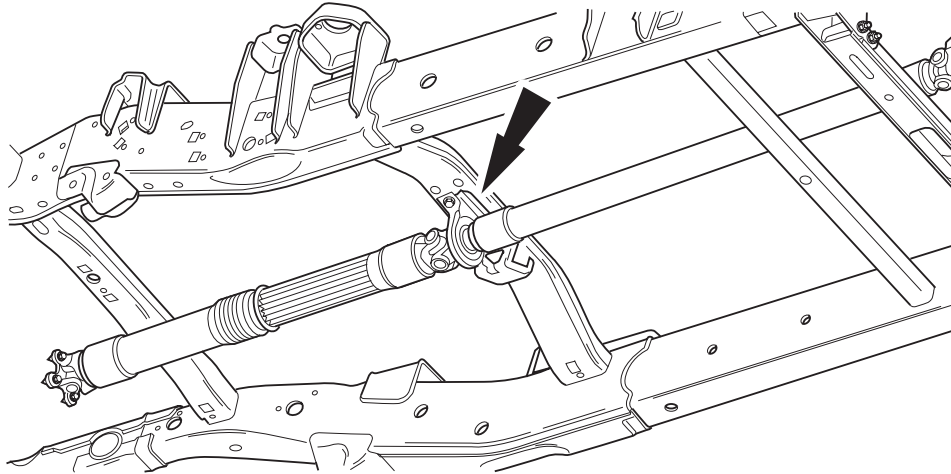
VIEW OF FRAME SHOWING DRIVELINE AND CENTER BEARING BRACKET LOCATION
